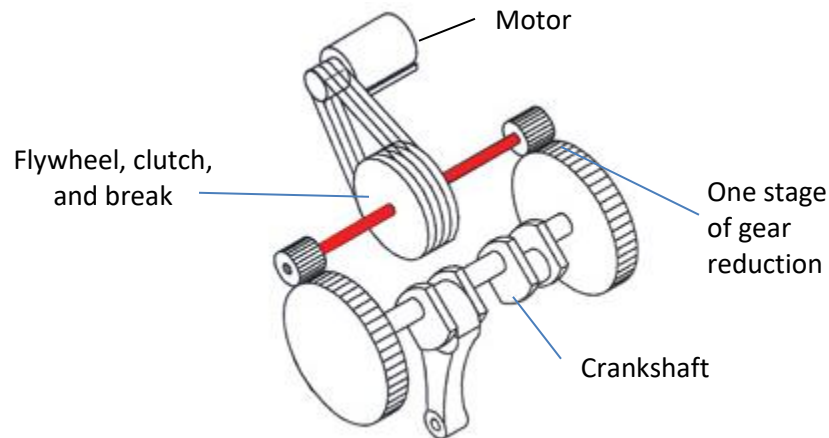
Schematic of a geared end drive system (reference: <https://www.thefabricator.com/article/stamping/get-the-most-out-of-your-press>)
